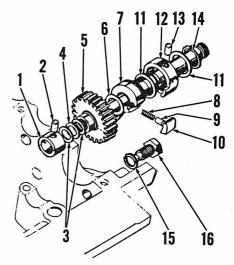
Exploded view of kick starter assembly used on four speed transmission.
